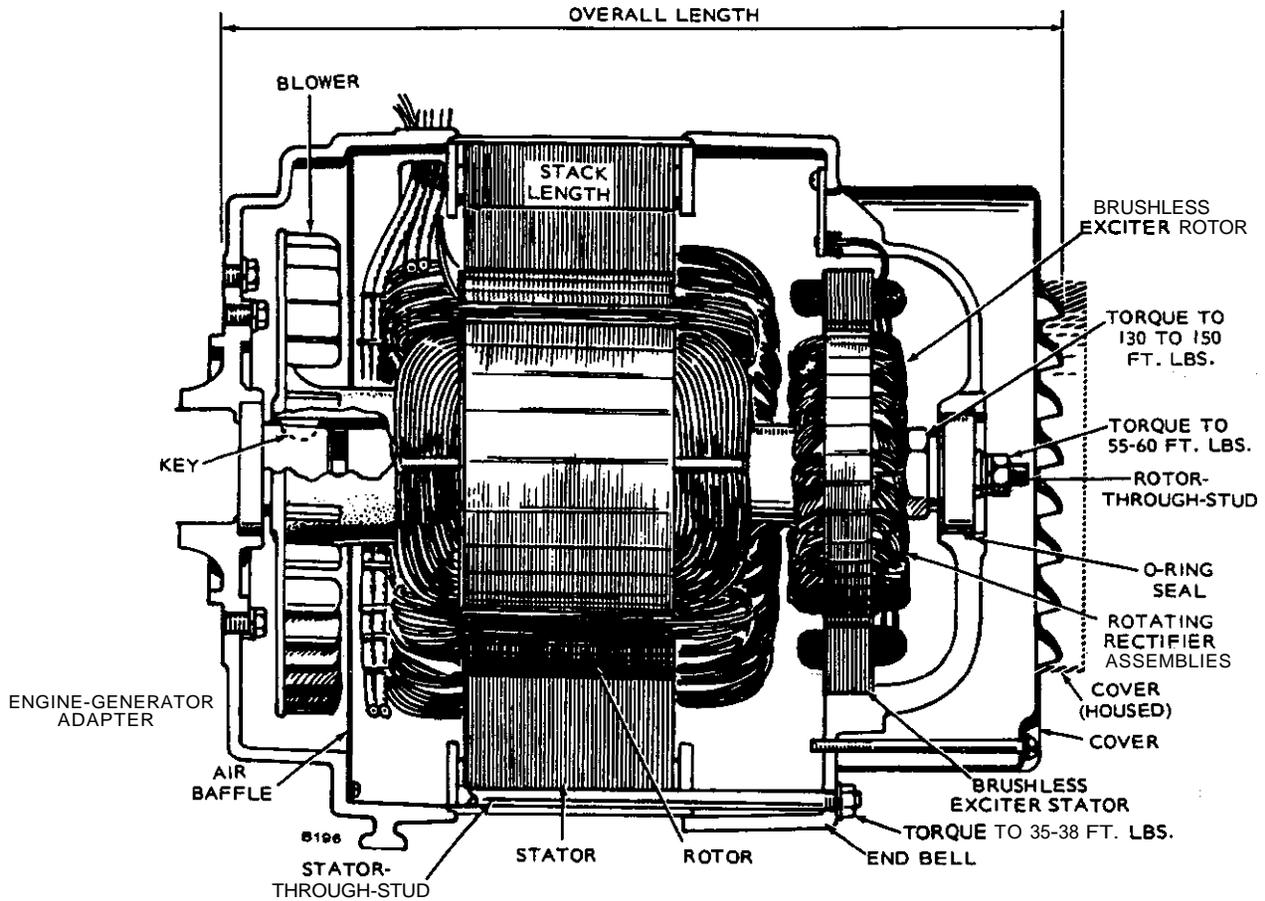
GENERATOR (SECTIONAL VIEW)
